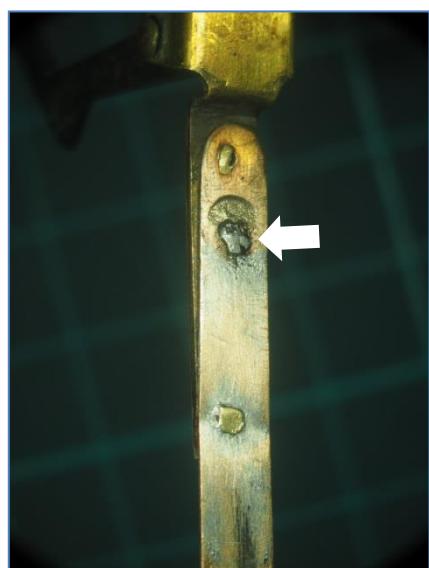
Soldered contact removed to reveal a steel contact (arrowed)
